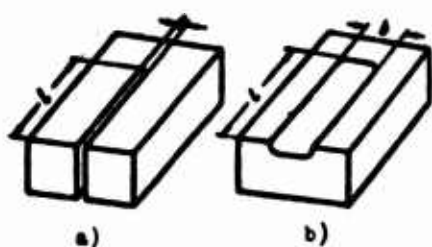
Cuts: a) through; b) surface; l — length of cut; b — width.
